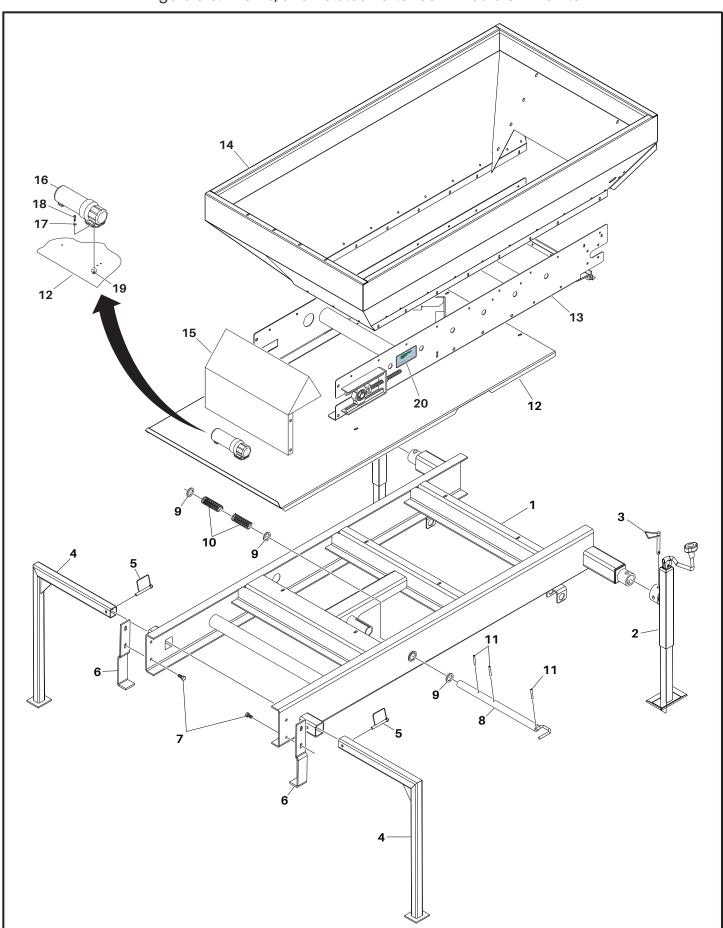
Frame, and Related Parts - John Deere UVM Units
